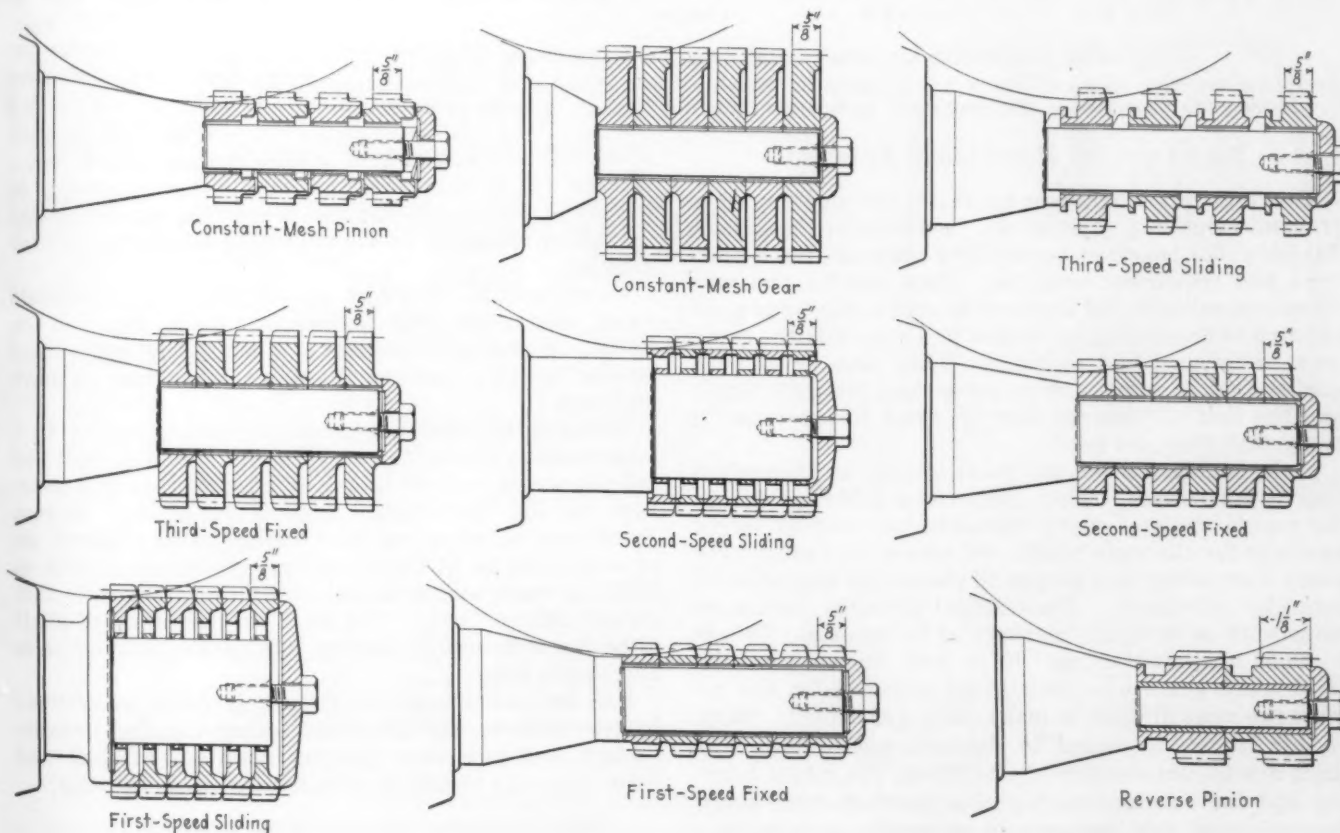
GEARS MOUNTED IN GANGS FOR FINISH-GRINDING WITH FORMED WHEELS
